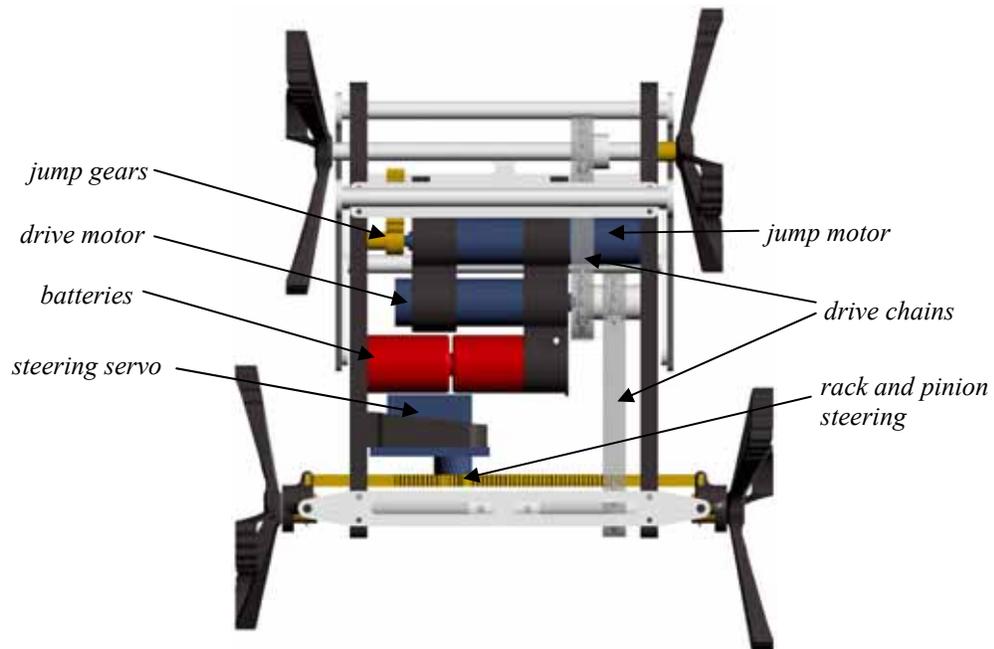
Top view of Mini-Whegs 6J with labels indicating components that affect the size of the chassis.
